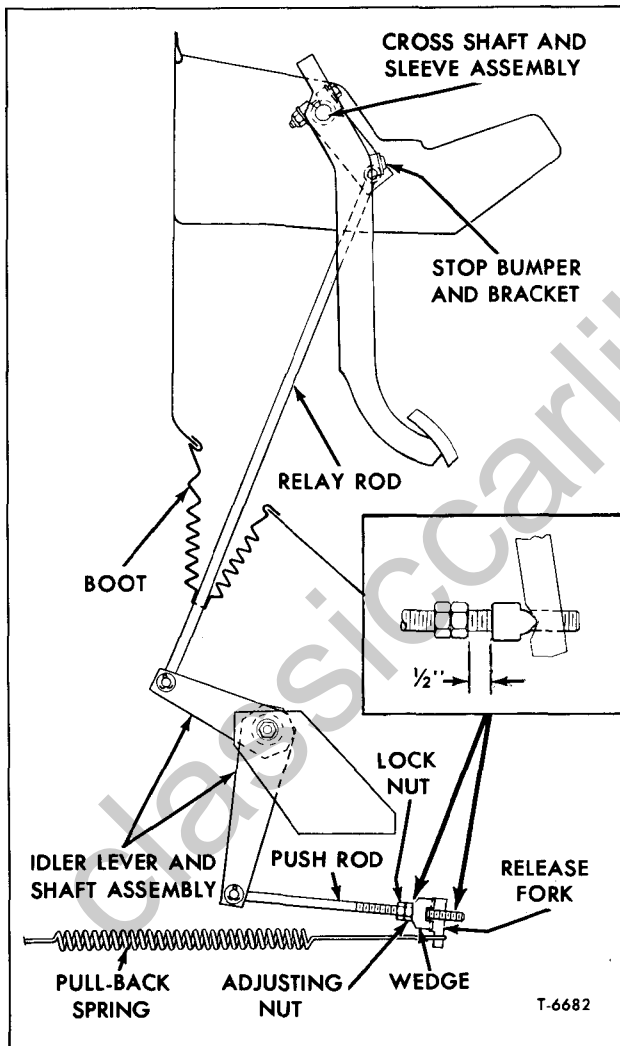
Mechanical Clutch Linkage (HM, JM 80)
